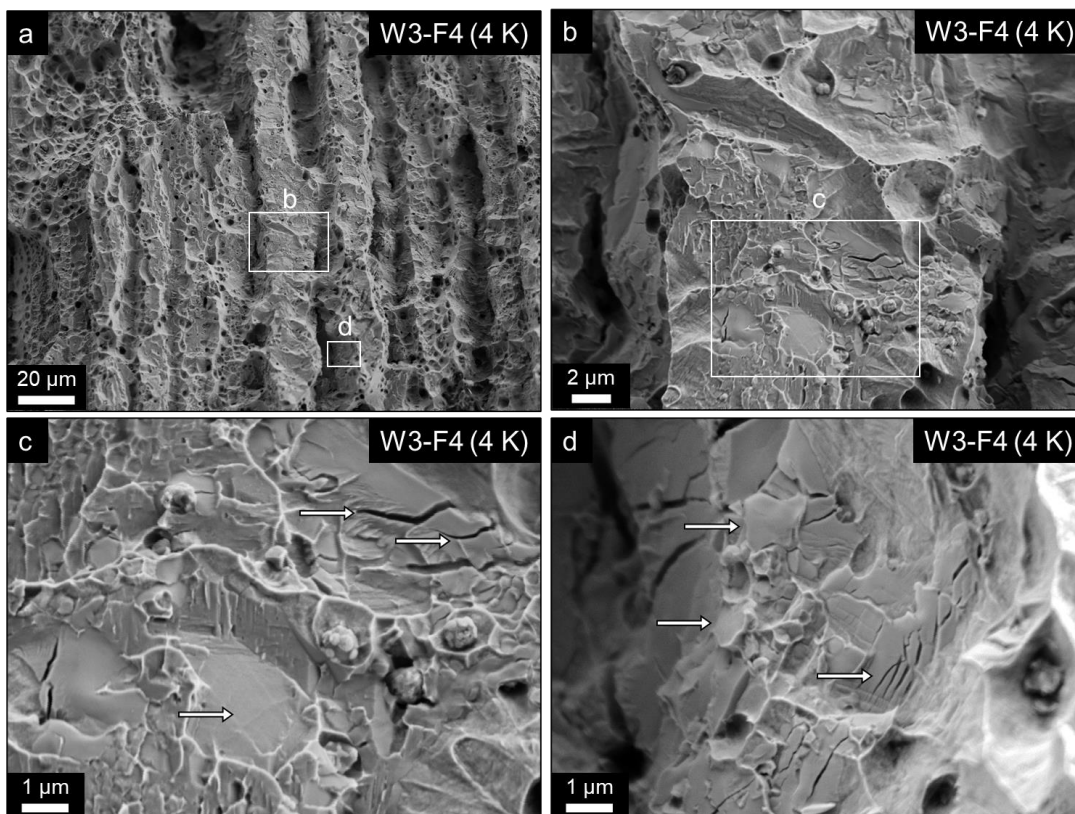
a) Cleavage fractures along crack paths, b) higher magnification of the crack path, c-d) higher magnifications displaying intergranular fracture.
